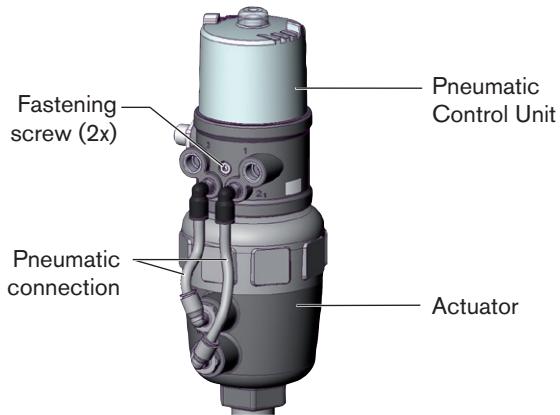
Rotating the Pneumatic Control Unit, series 20xx
